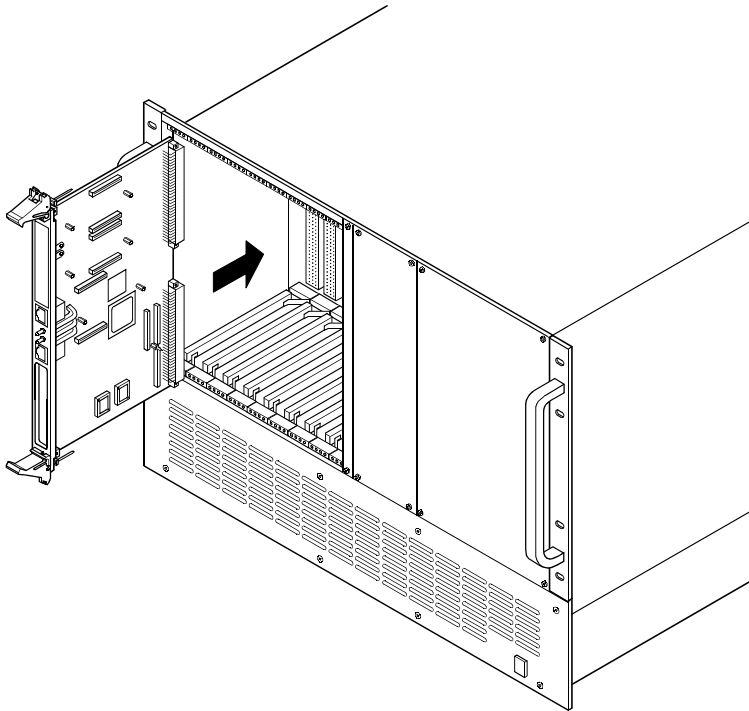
MVME2100 Installation and Removal From a VMEbus Chassis
